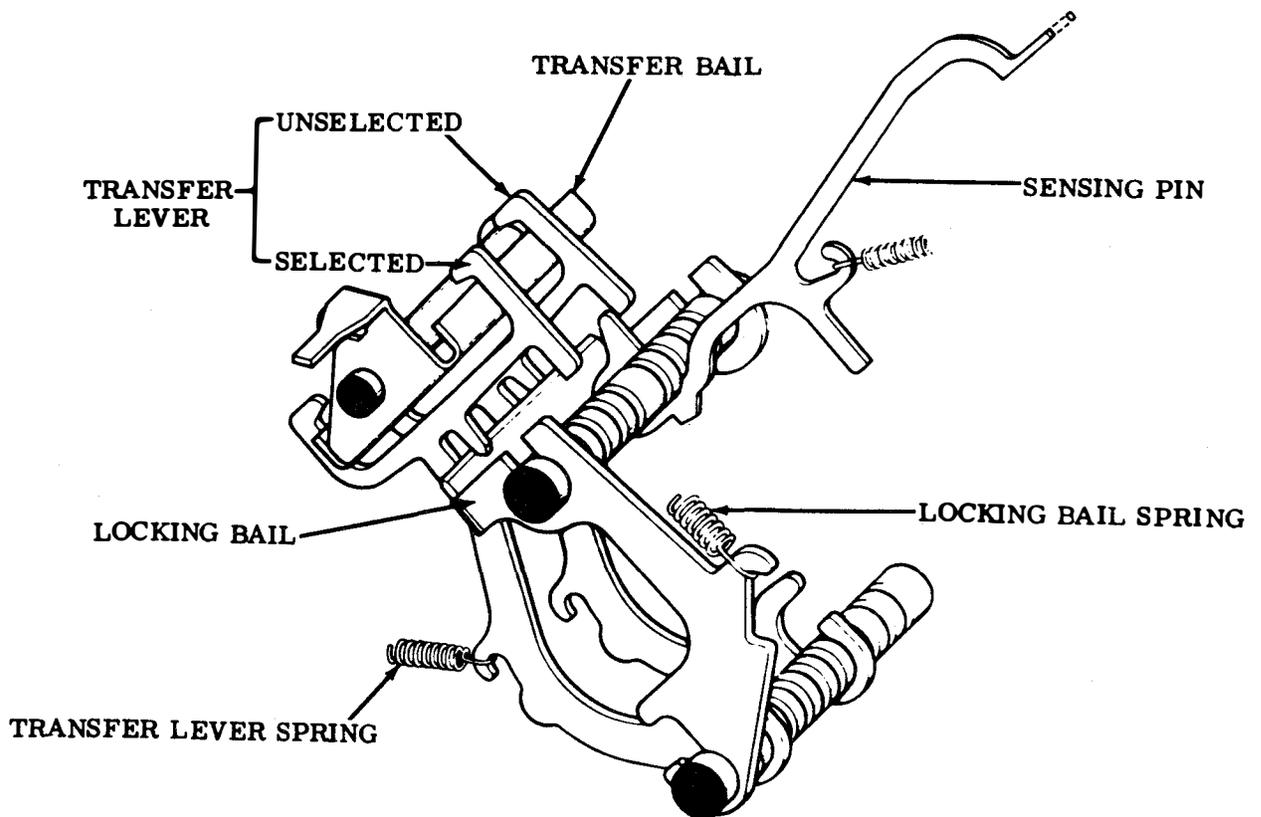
Locking Bail and Transfer Lever Mechanisms
